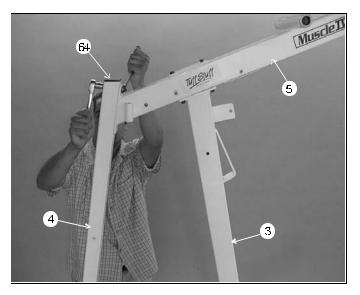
Secure the Top Pulley Assembly (#5) to the Front Jpright (#3) using two Hex Head Cap Screws 3/8-16 X 4 1/4 #99) four Flat Washers SAE 3/8 (#90) and two Nylon Insert Lock Nuts 3/8-16 (#86). Next, secure the Top Pulley Assembly (#5) onto the Rear Upright (#4) using one Hex Head Cap Screw 3/8-16 X 3 (#94), two Flat Washers SAE 3/8 #90) and one Nylon Insert Jam Lock Nut 3/8-16 (#86). Note: This bolt should be placed in the top hole of the Rear Upright (#4).
